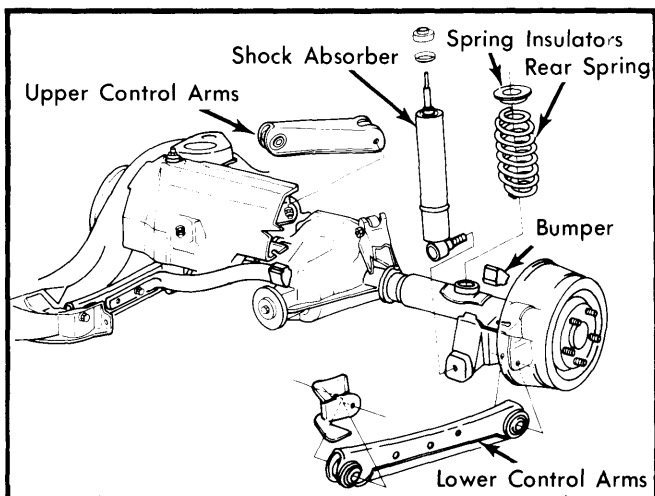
Coil Spring Type Rear Suspension Assembly (Ford, Mercury, Lincoln Continental & Mark VI)
